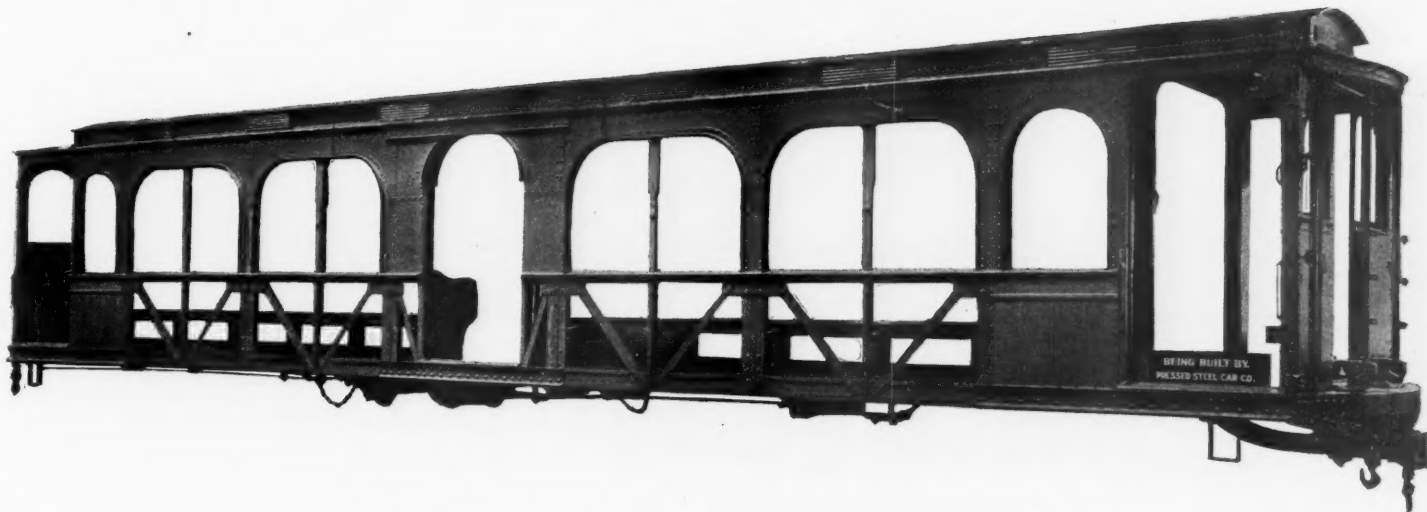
Truss Side Frame of Hudson Companies' Steel Cars.
